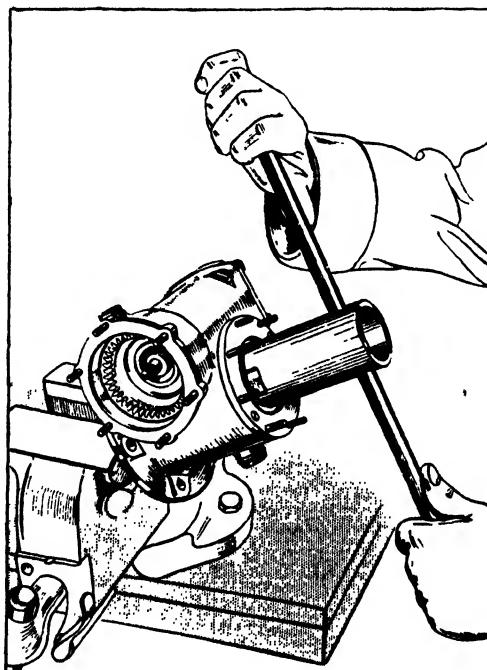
Fitting the hand starter clutch adjusting nut.
